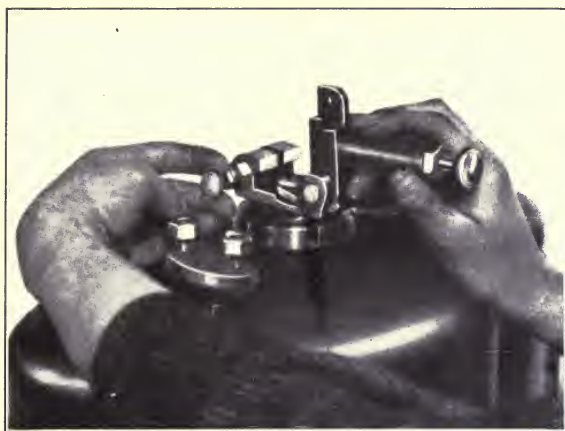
Method of extracting shell and reloading cartridge starter (old style).
